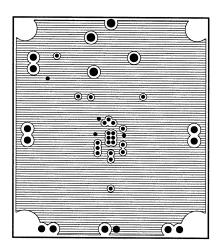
Recommended IVG PC board layout: upper inner-layer layout
